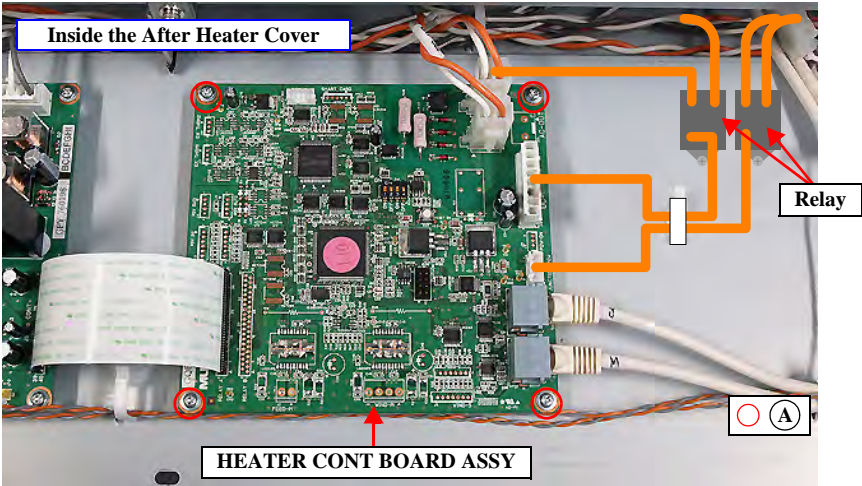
Removing the HEATER CONT BOARD ASSY
